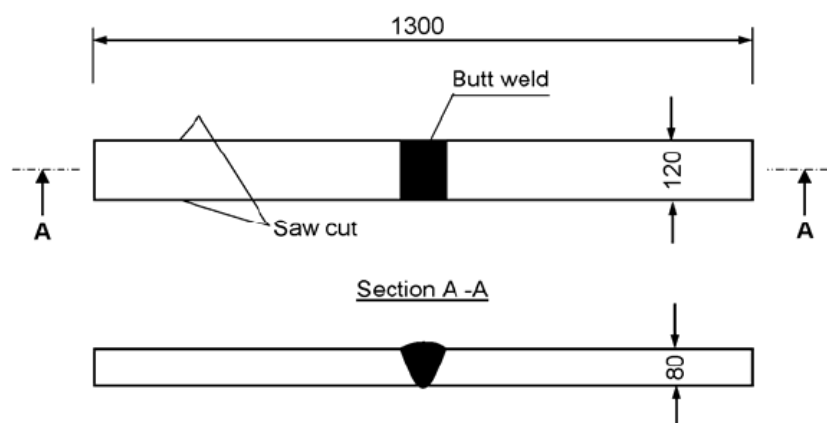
Geometry of the butt weld specimens (von Selle, Doerk, Kang, Kim, 2011)
